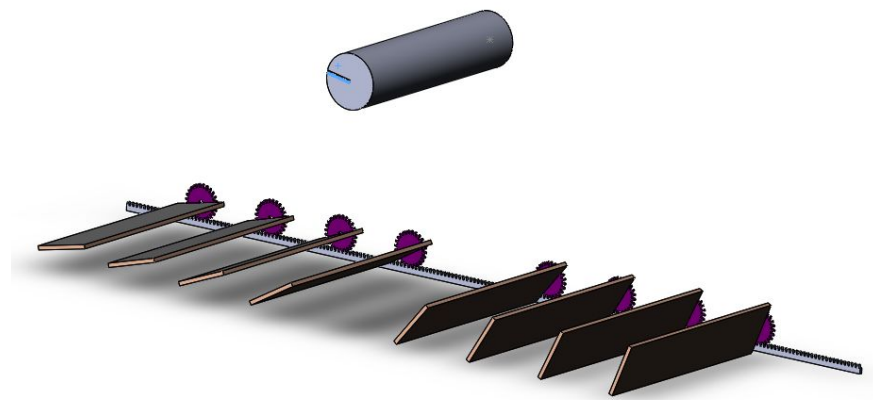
SolidWorks Design for the strips (Triometric View) Sunset Position
